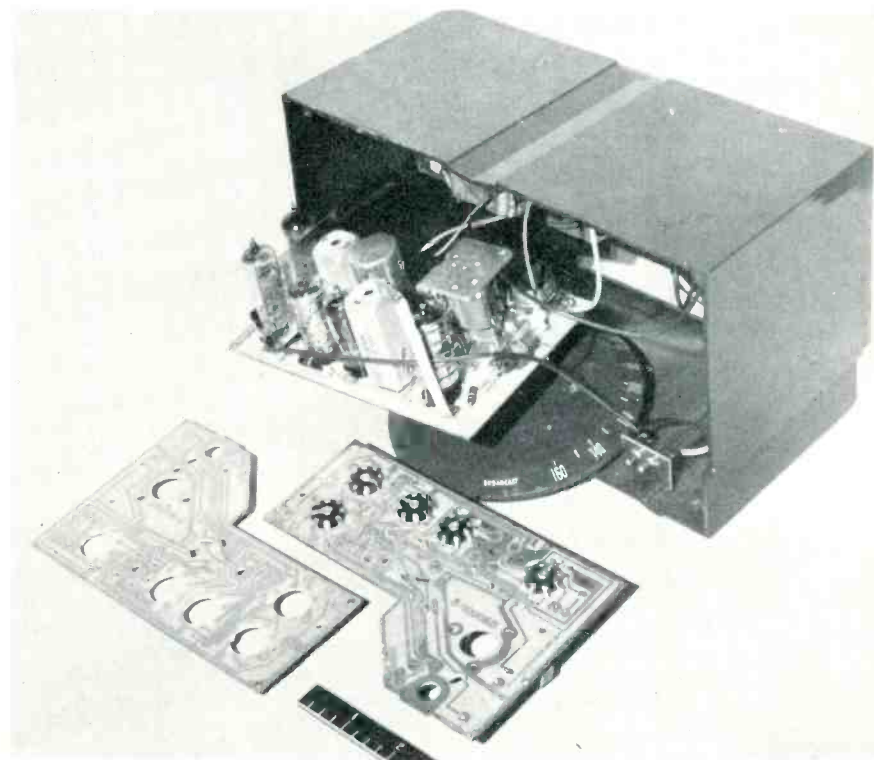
A clock radio made by Hallicrafters utilizing the Auto-Assembly technique. Lower left: printed circuit phenolic chassis; lower right: chassis with sockets added.
